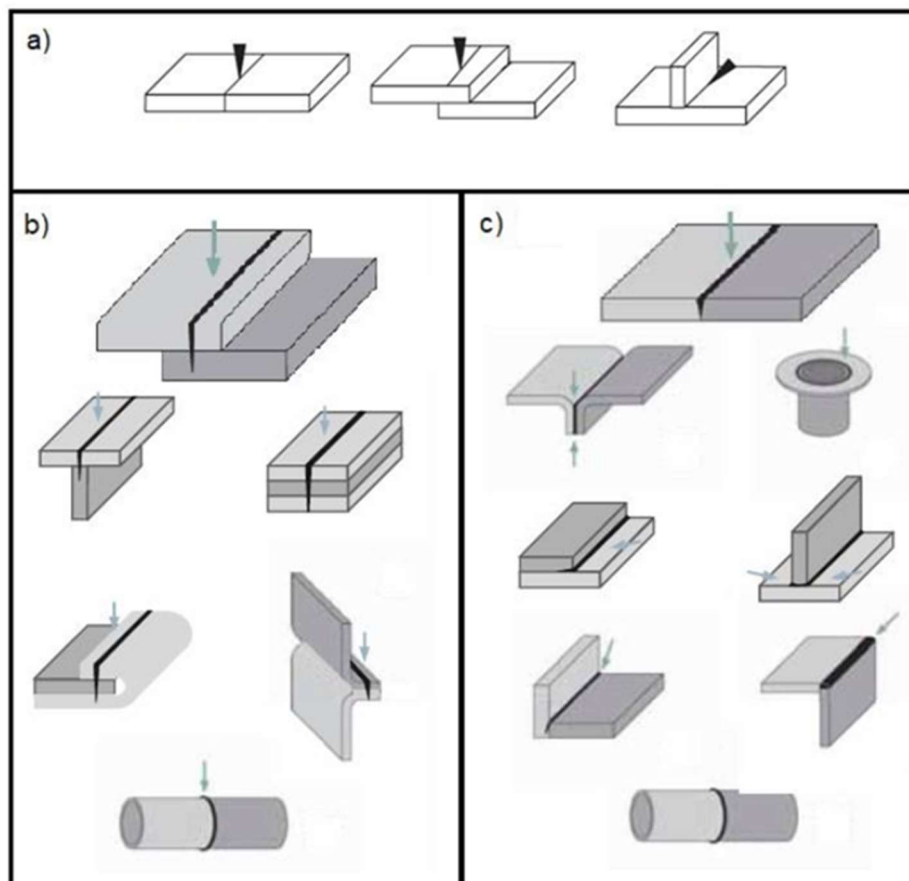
Most common joint designs for laser beam welding in general (a) as well as lap joints (b) and in detail (c) [courtesy of University of Oulu, FMT group, Finland].
